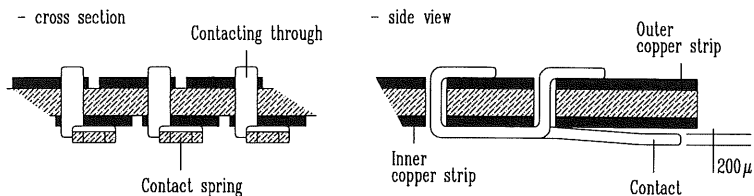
Field forming strip foil. The upper picture shows the cell foils with the contacting through, which connects the opposite strips. In the lower picture the cover foil with the contact springs, which perform also the connection, is illustrated.
